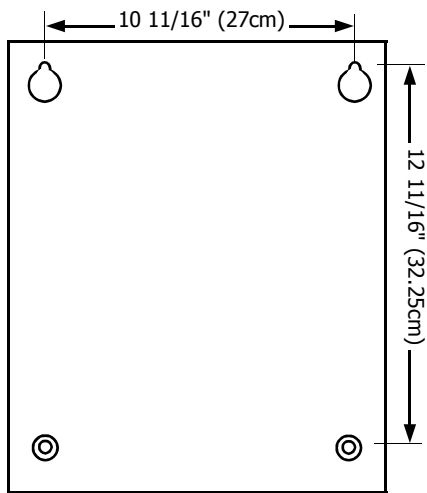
NAX-200X Cabinet Mounting Hole Dimensions
